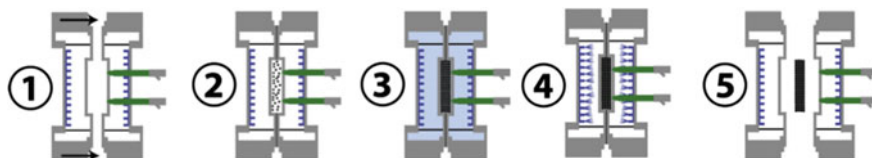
Steam-chest molding process: 1: closing; 2: filling with beads; 3: steaming; 4: cooling; 5: ejection [6]. *Copyright (2018) Elsevier
